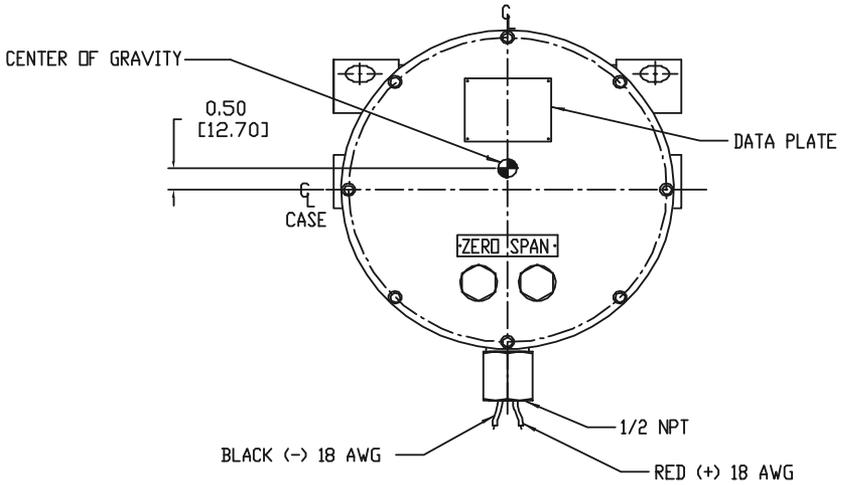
764 transmitter, front view (connector assembly not shown)
